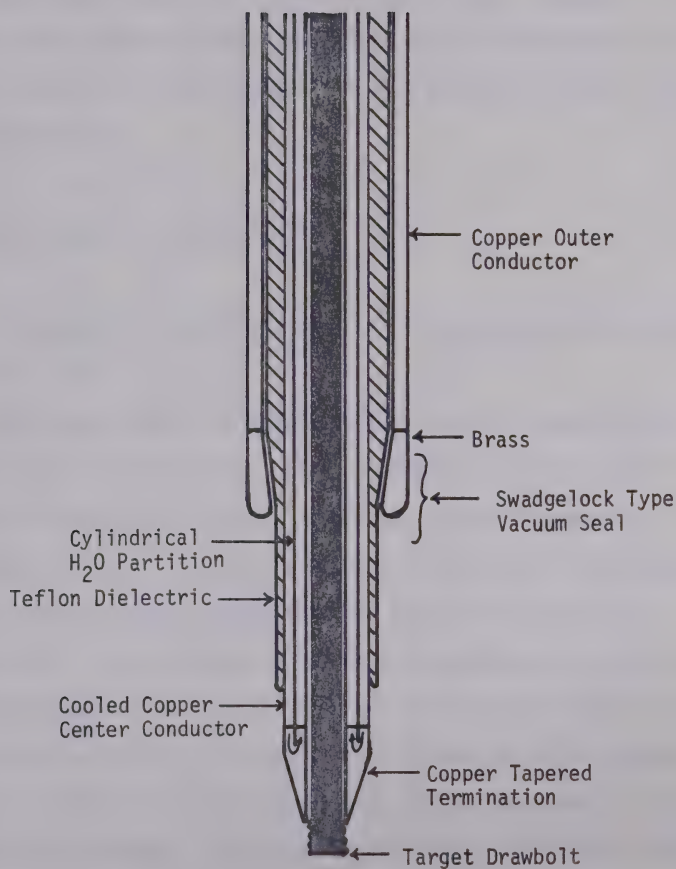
Cross-Section of R.F.-D.C. Probe - Target Mounting End.
